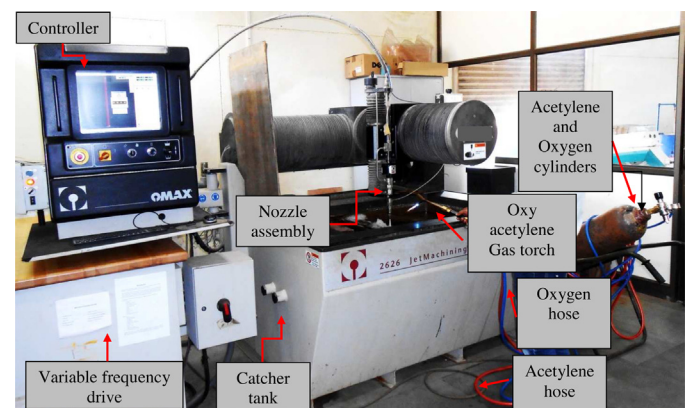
Experimental abrasive water jet machine setup assisted with oxy acetylene gas cutting.
